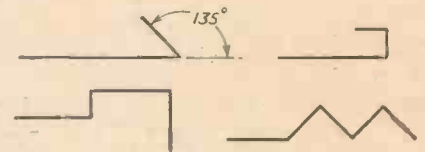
A few examples of sections which the machine will fold without attachments. Many other variations and combinations of these are possible.
